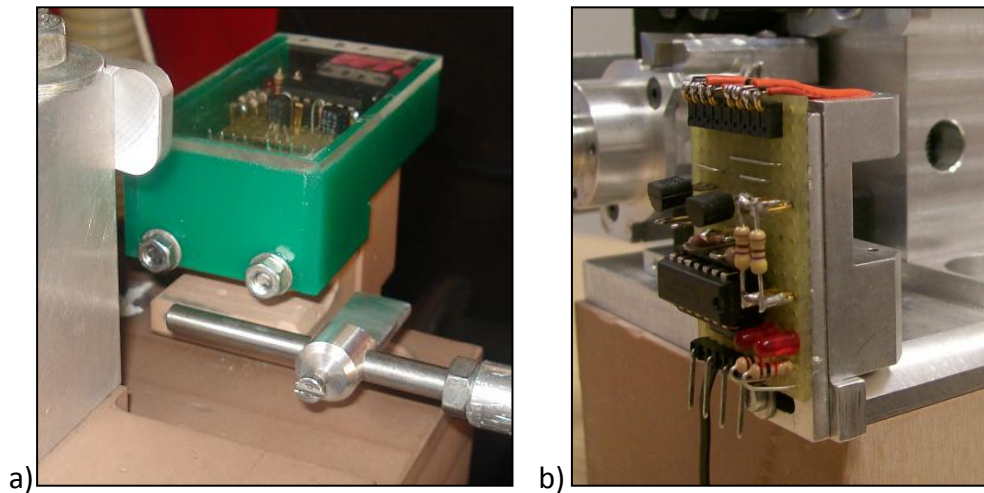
$V_{imp}$  measuring sensor for the a) first and b) second version of the tool holder block.
